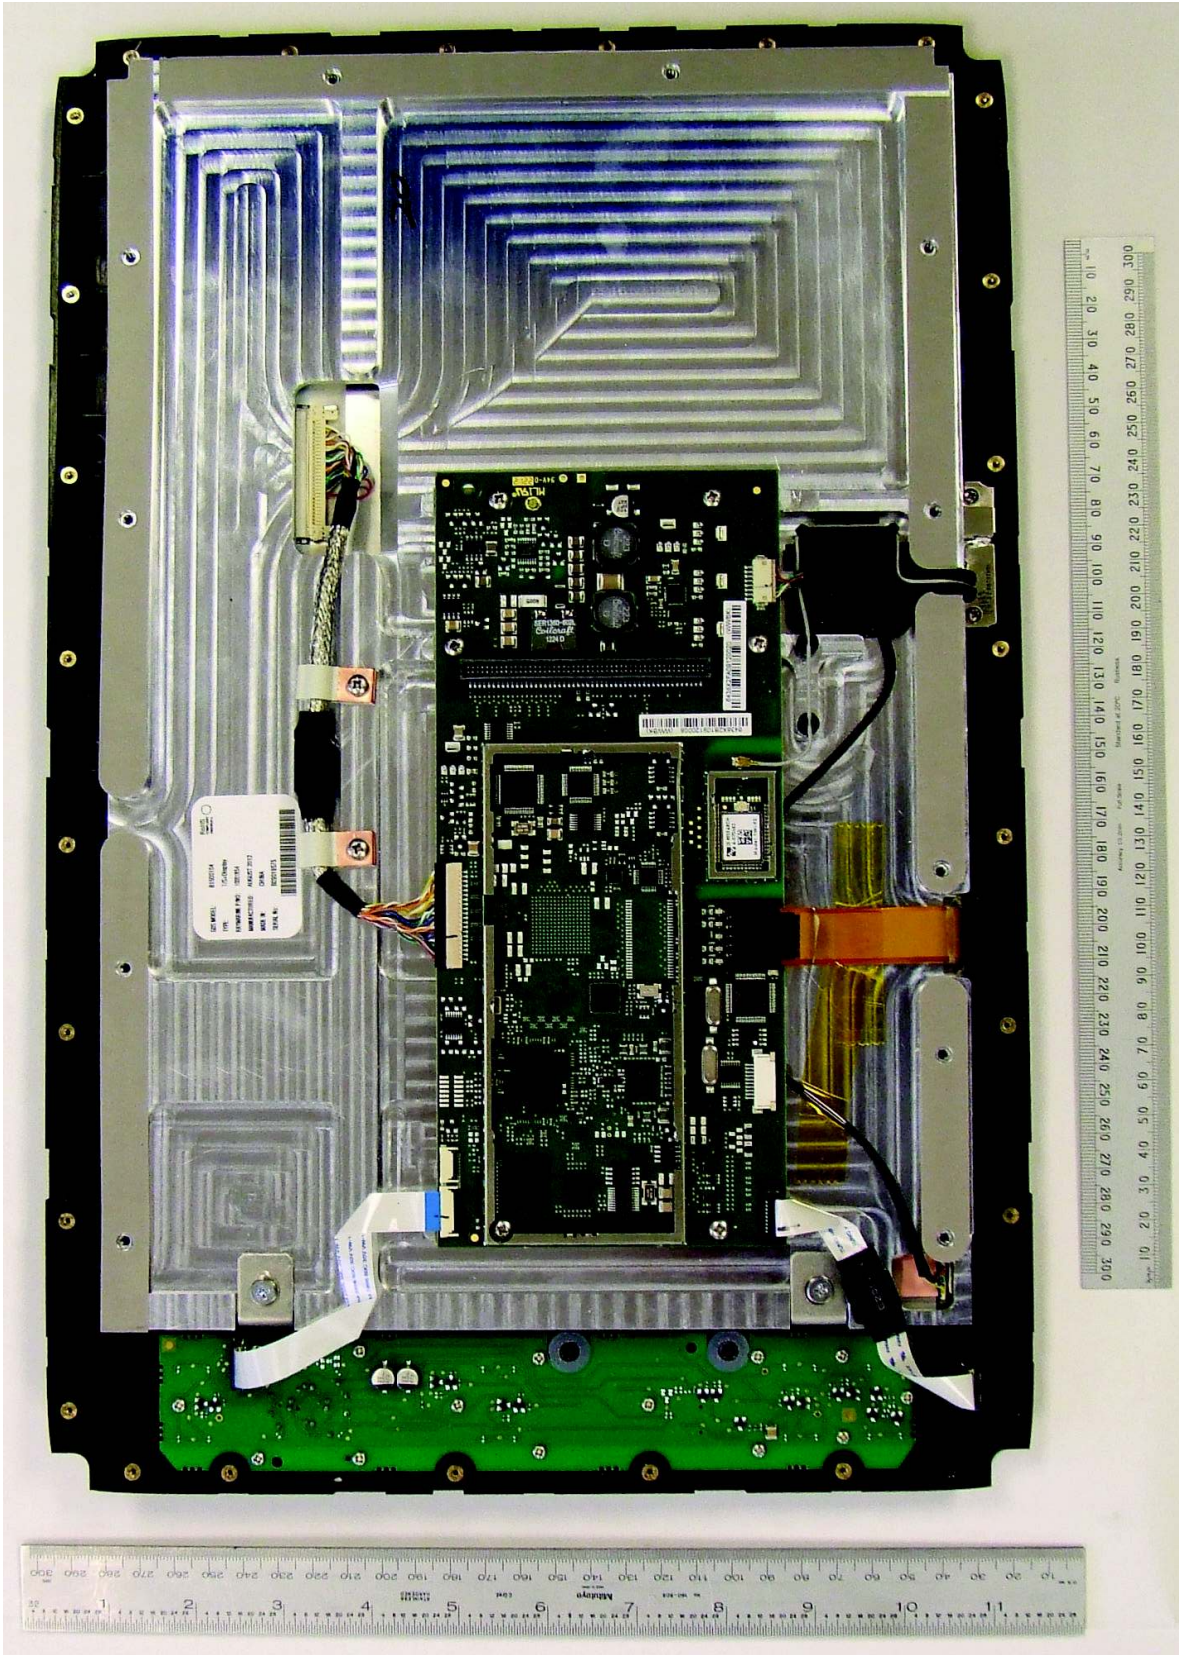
Rear of e165 LCD with heatsink and location of CPU board.
